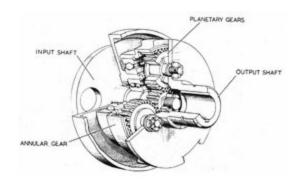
Mk IX hose-drum unit, two-speed gearbox gear train
